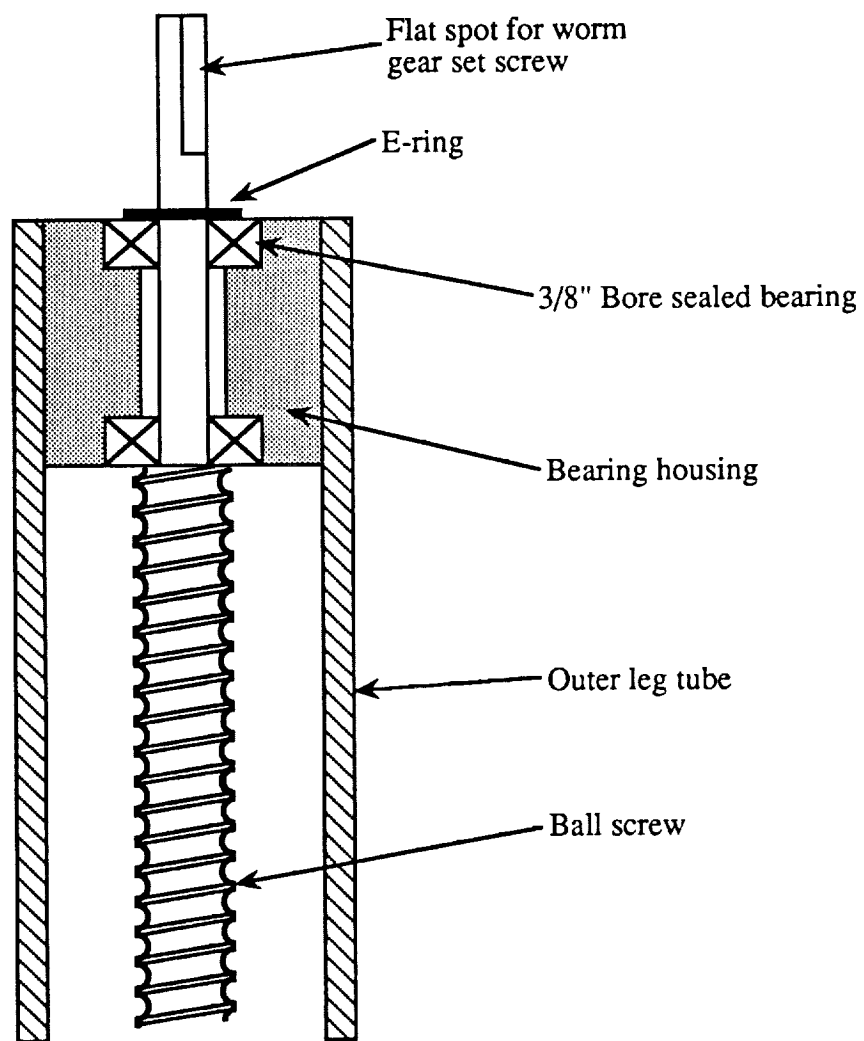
Bearing housing / ballscrew mount (cross sectional view).
